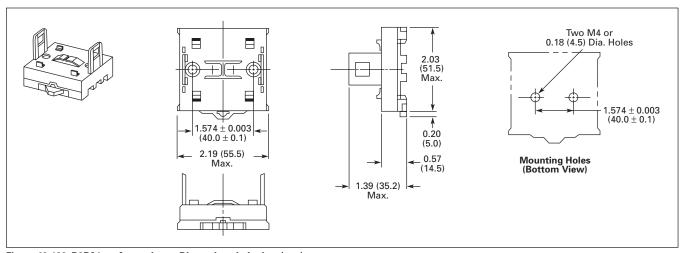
D8PA1 — Approximate Dimensions in Inches (mm)
